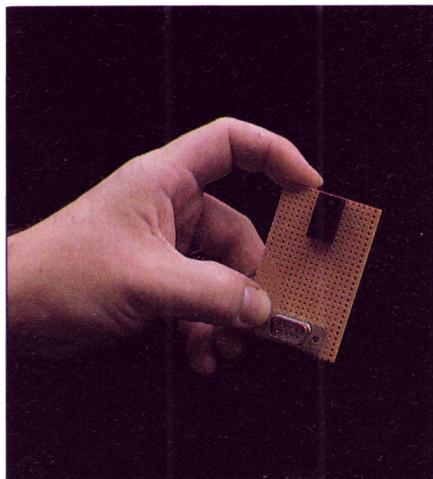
The back (wiring) face of the board, with the DB-9 socket and DIP socket in place.
